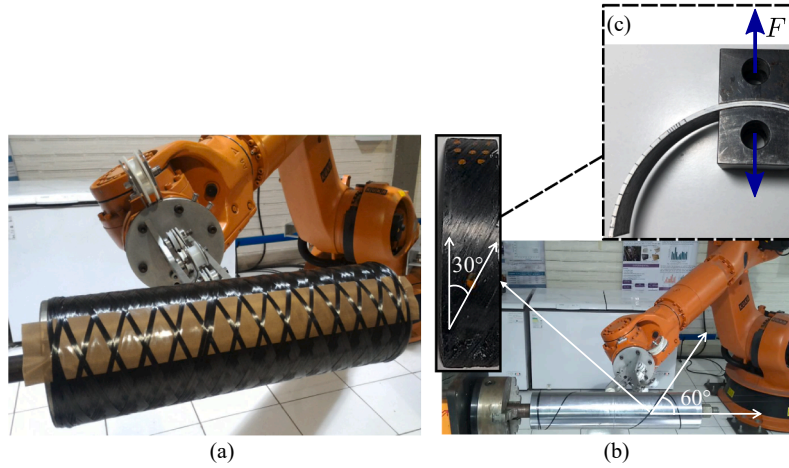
(a) Use of the PTFE film during winding, (b) fibre angle illustration, and (c) specimen glued to the ending blocks for the CDCB test.
